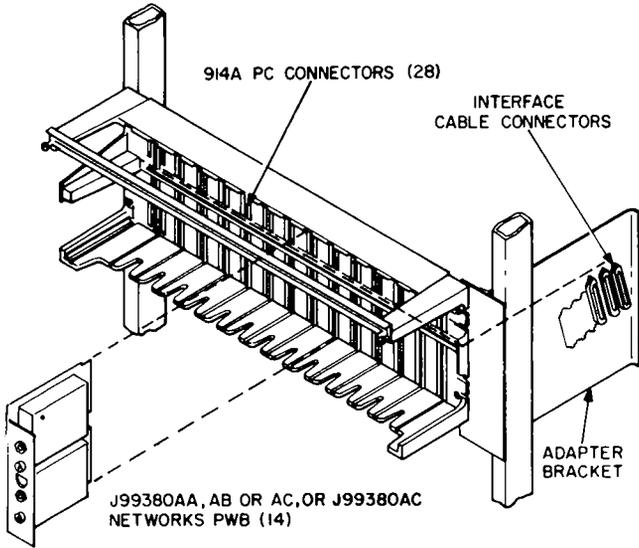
Shelf Assembly for 837-Type Networks on PC Boards, J99380C (MD)
